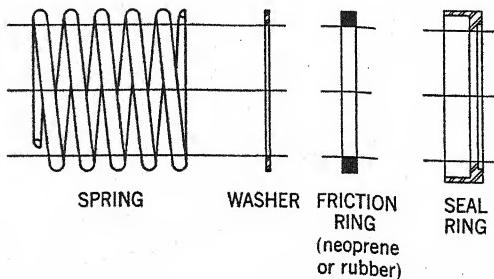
Rotary seal employing rubber ring for friction. (Courtesy Rotary Seal Co., Chicago, Ill.)
